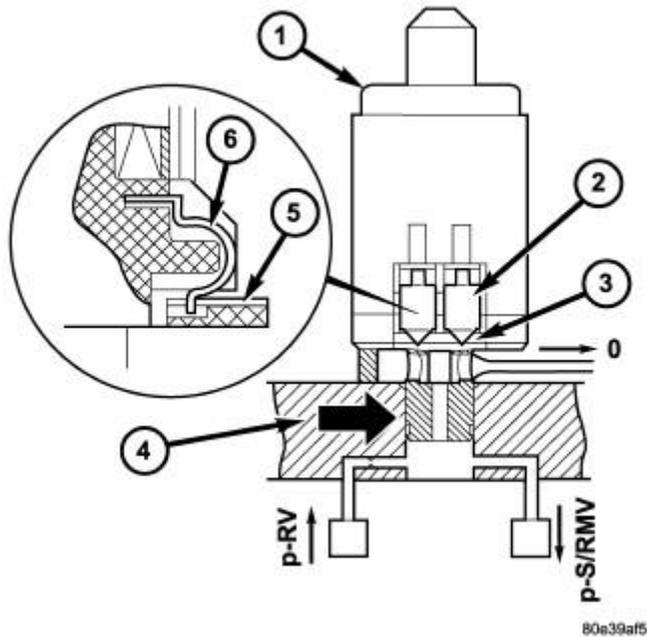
Cutaway View Of Shift Pressure Control Solenoid Valve
